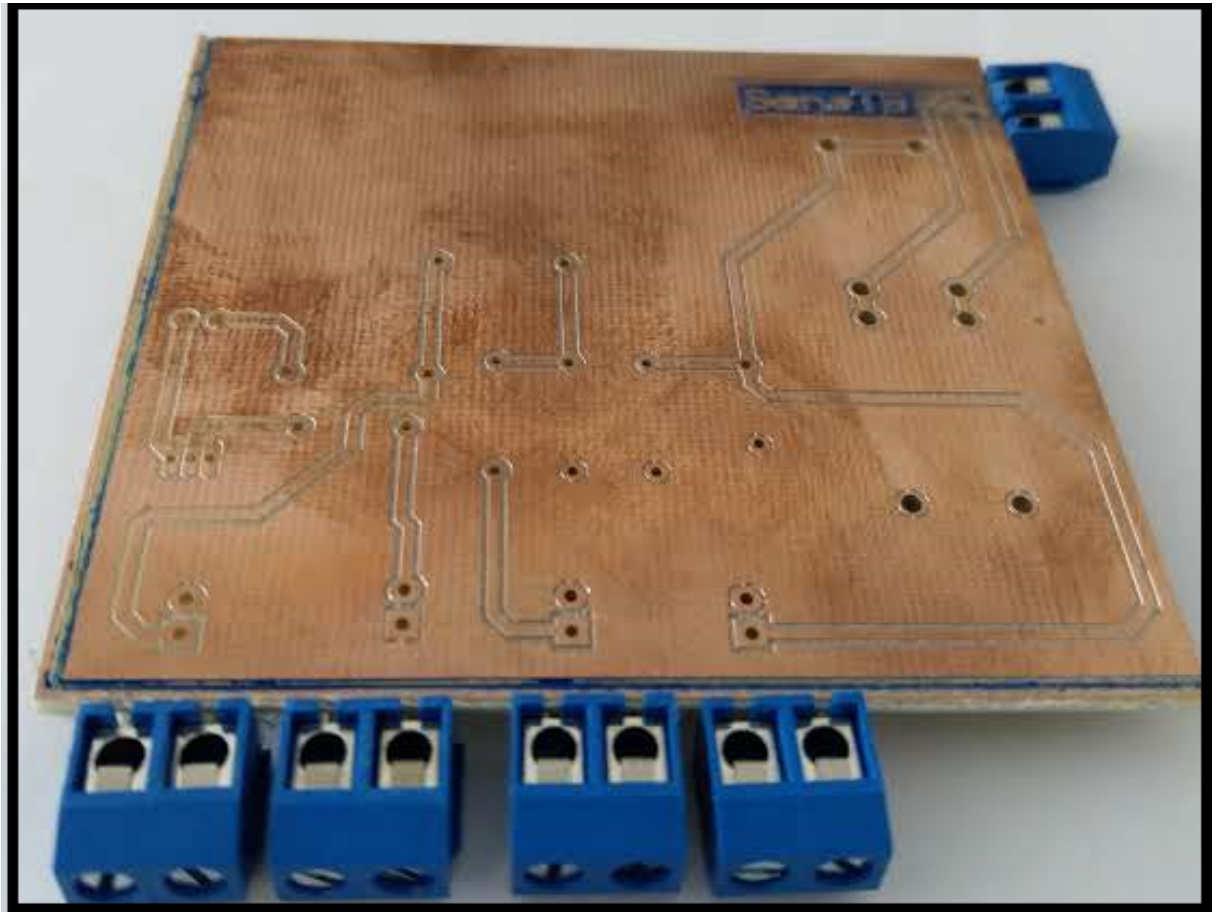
A manufactured GeneTB PCB board designed with Altium designer.
